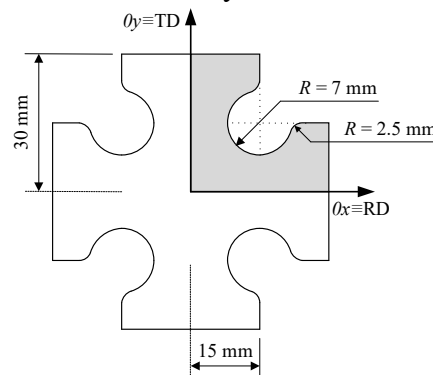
Geometry and dimensions of the biaxial tensile test on a cruciform sample [5].
